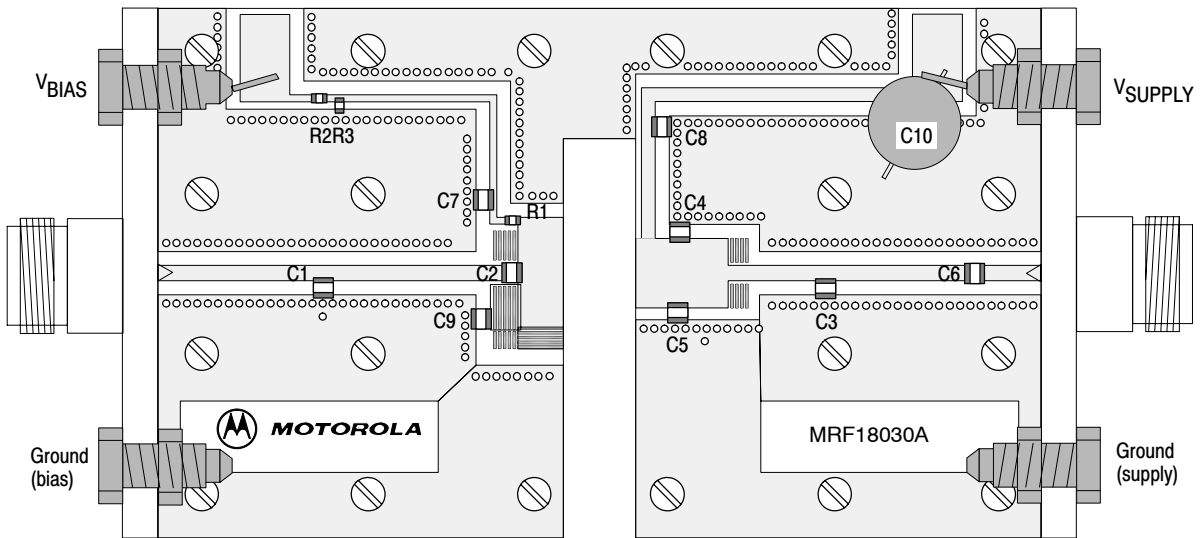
1805 - 1880 MHz Test Fixture Component Layout
